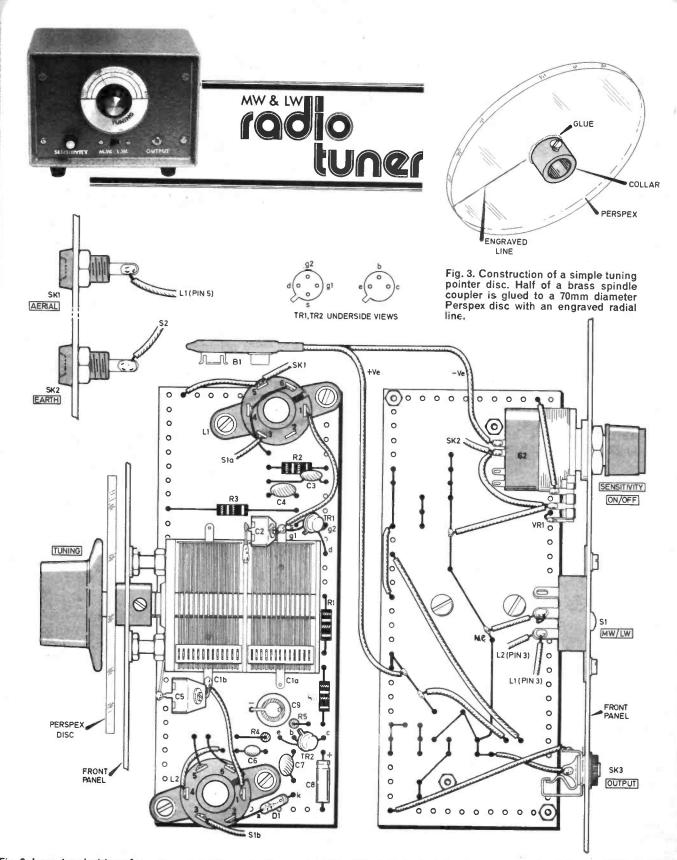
Layout and wiring of components on the top and underside of the plain perforated circuit board and interwiring to panel mounted components.
